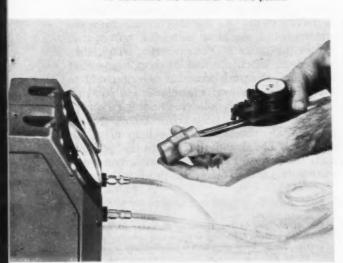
A special C-frame assembly is employed to check external taper. The frame holds two pairs of jets for measuring the taper at two points.
